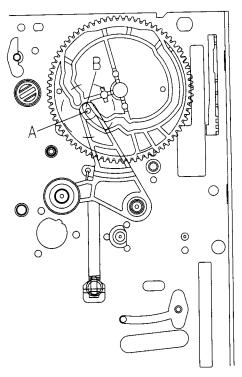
DATUM POSITION OF PINCH LEVER TOTAL ASS'Y & CAM GEAR
